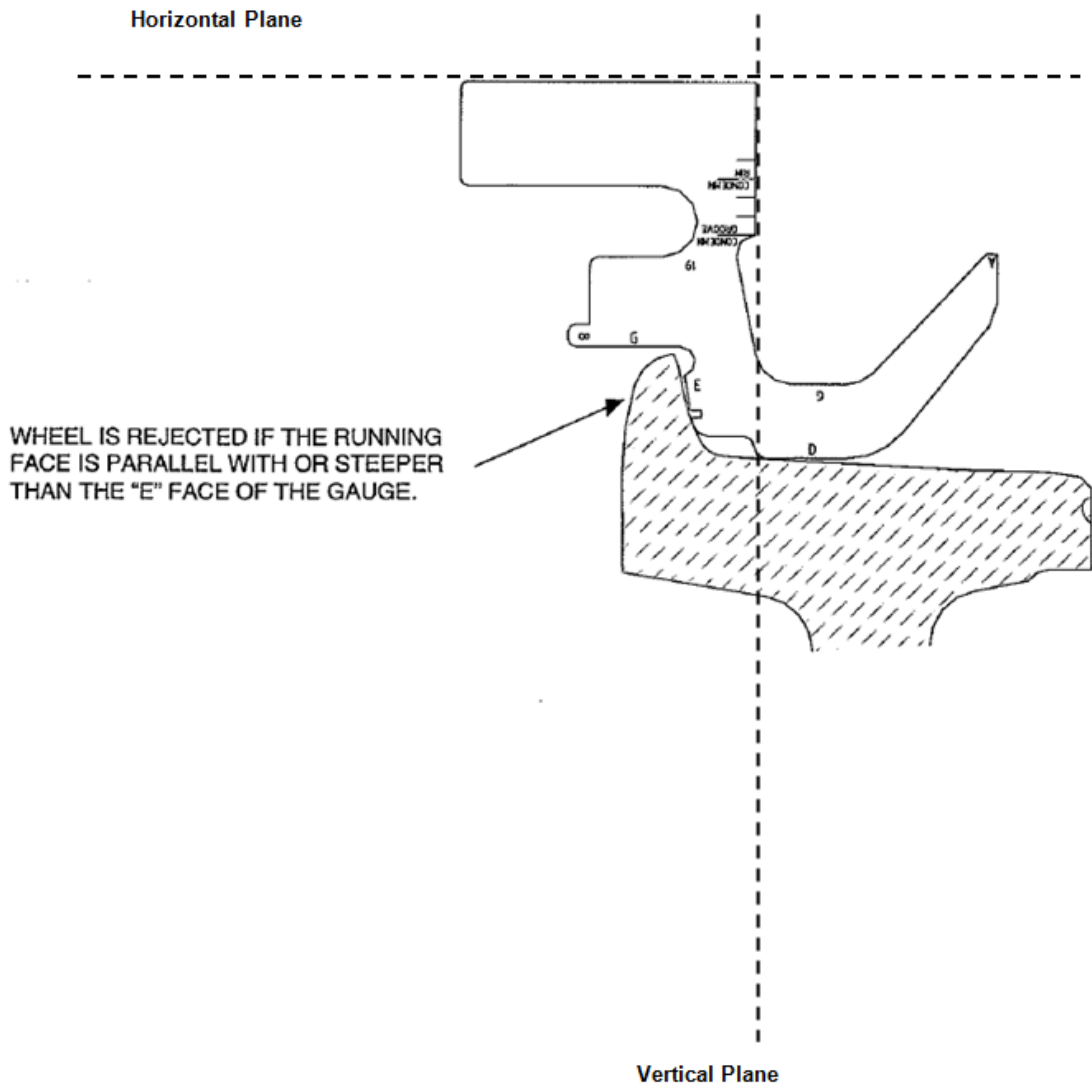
Wheel Condemn Gauge No. 300008 - steep flange indication
